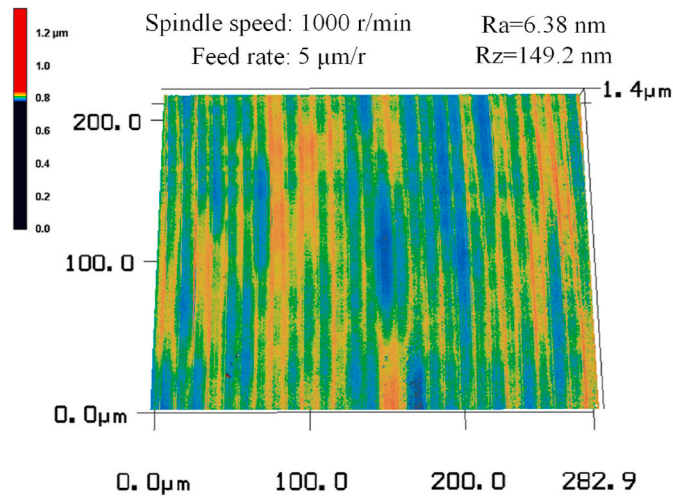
Optical 3D photographs of the oxygen-free copper surface after the BT tool cutting.
